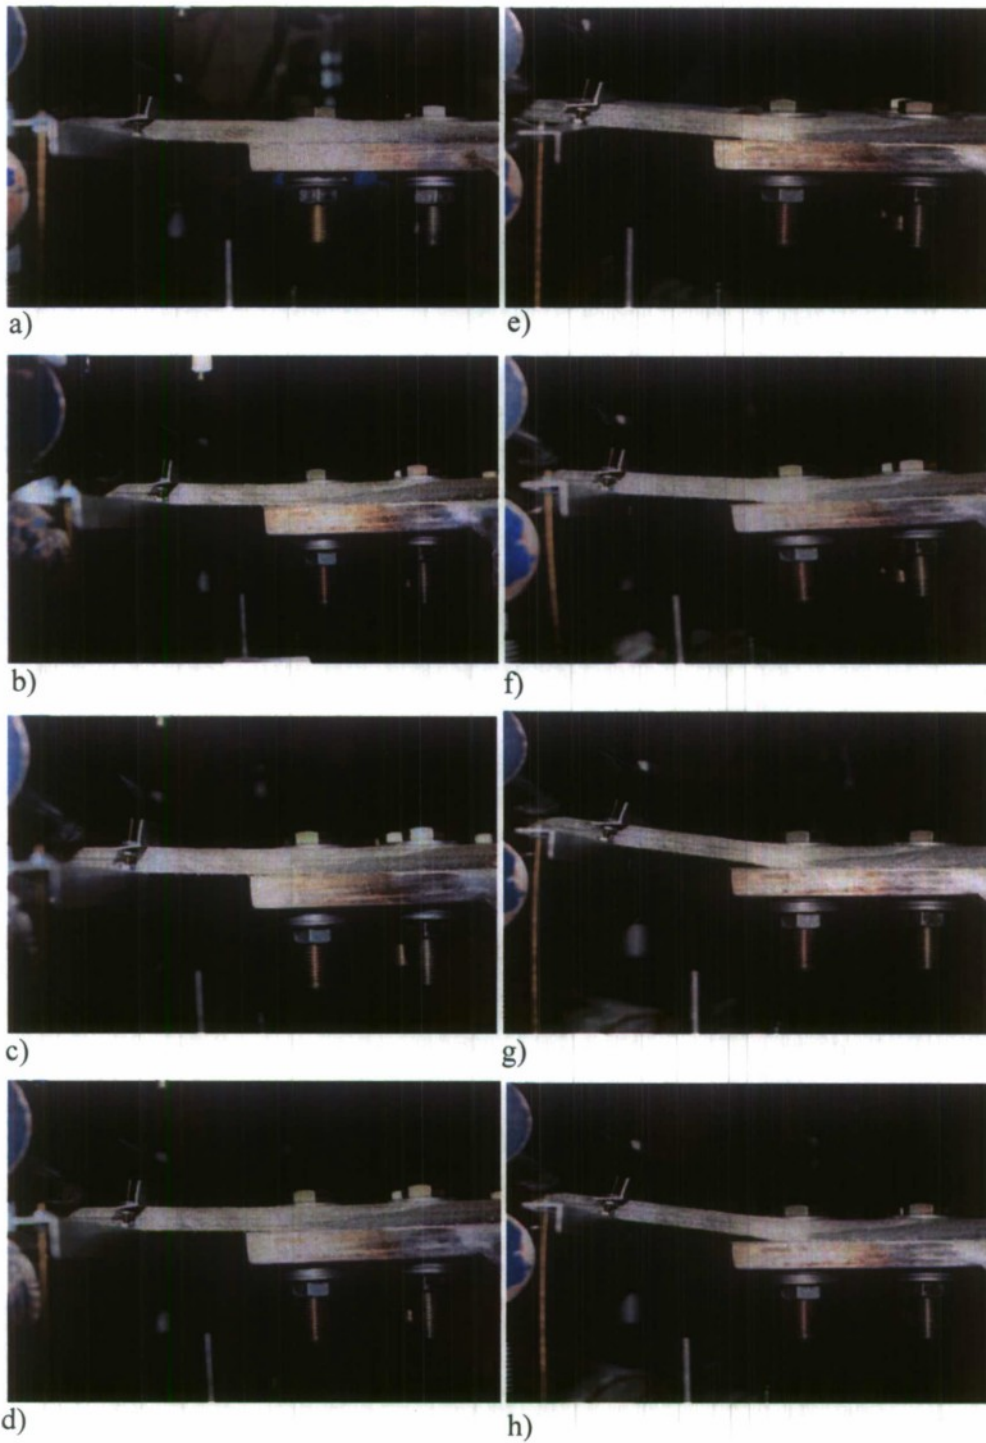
28-Ply Bolted Joint Failure at Gripper
